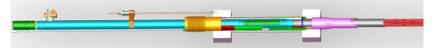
Representation of calandria tube with pressure tube, end fitting and fuel bundle
